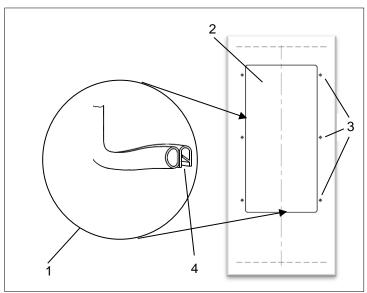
Install profile seal DTS cooling unit (side attachment)
